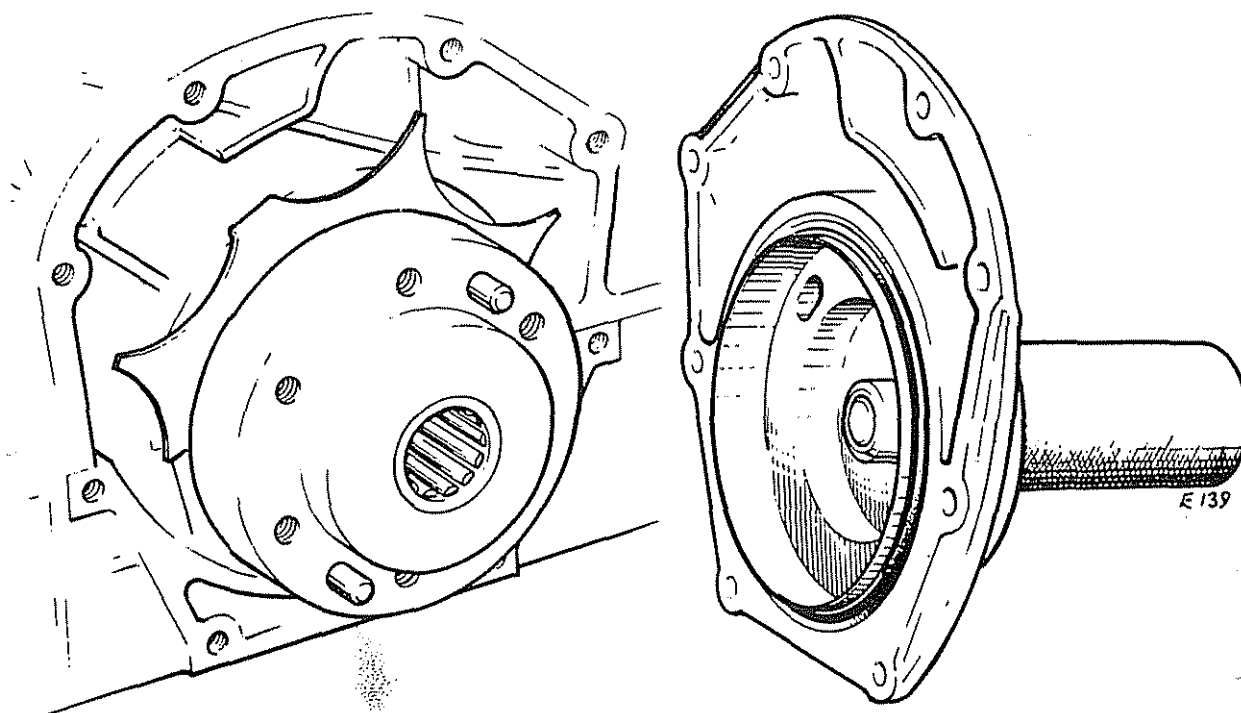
Using Tool '84A' to fit rear oil seal housing
